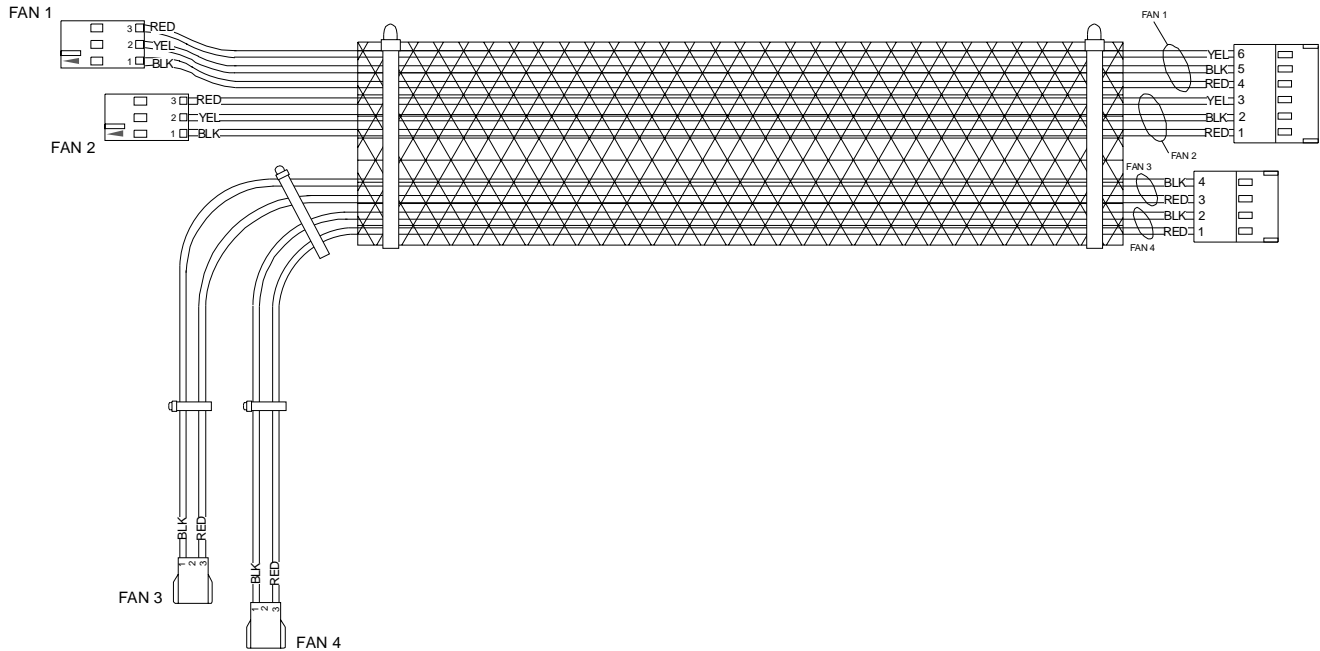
Lamp and Bulkhead Fans Cable Assembly
